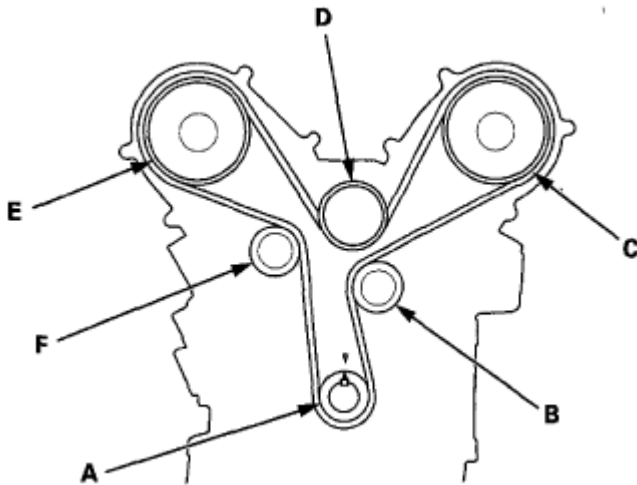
Identifying Drive Pulley, Idler Pulley, Front Camshaft Pulley, Water Pump Pulley, Rear Camshaft Pulley And Adjusting Pulley
